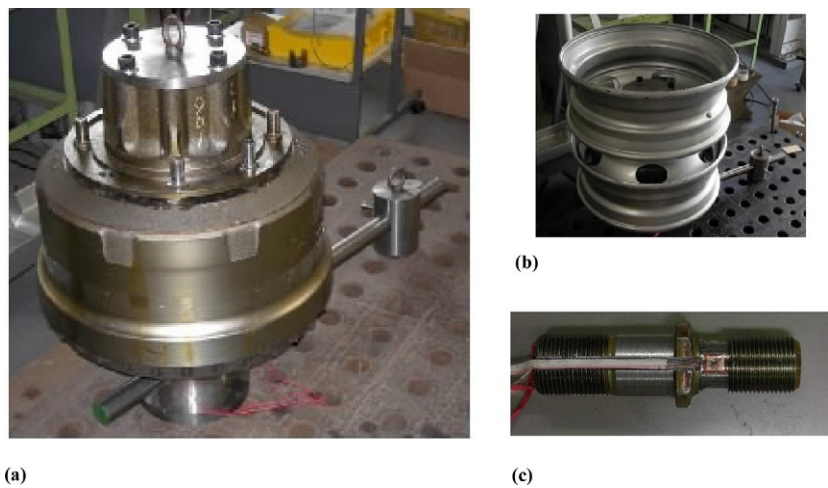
Experimental setup by use of actual parts of wheel joint. (A) Experimental setup for examining tightening process, (B) installing inner and outer wheels, and (C) test specimen of wheel bolt.
